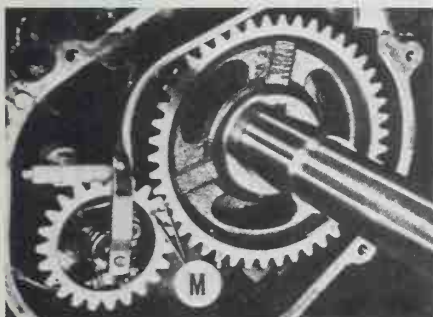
Align timing marks (M) as shown when reinstalling timing gears.
